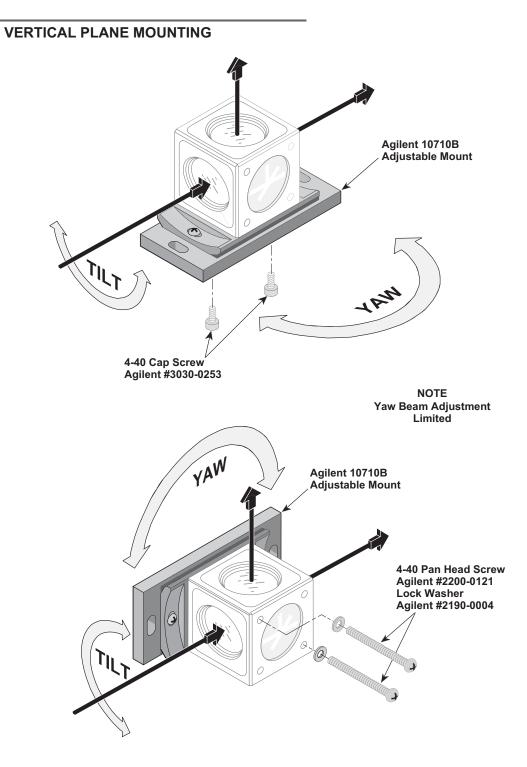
Vertical plane mounting using the Agilent 10710B adjustable mount
